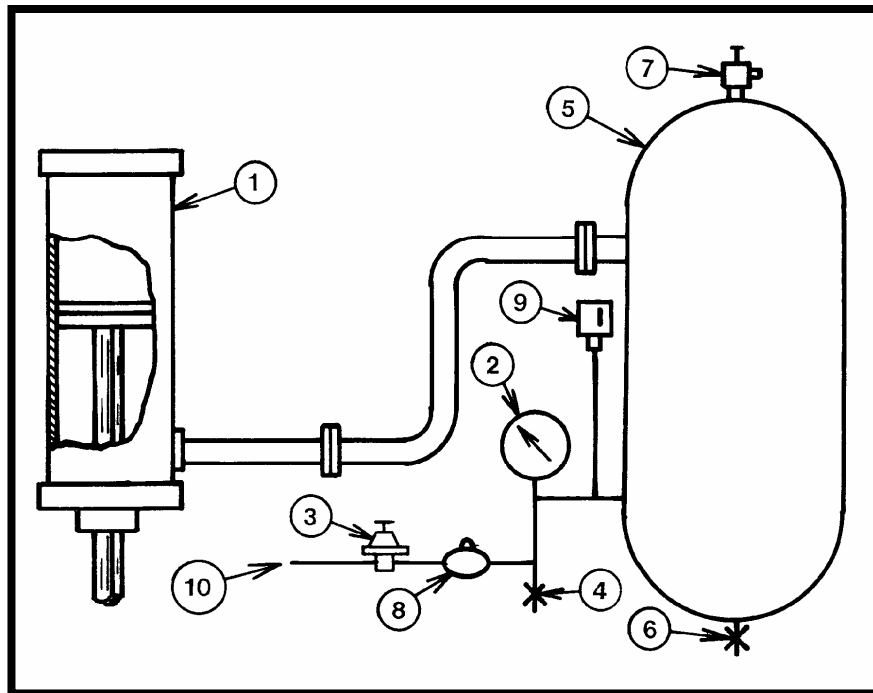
Diagram of a typical mechanical press counterbalance system: (D1) counterbalance cylinder with a piston rod that attaches to the press slide (not shown); (D2) pressure gauge; (D3) pressure regulator; (D4) blow-down valve; (D5) surge tank; (D6) water drain valve; (D7) safety pop-off valve; (D8) check valve; (D9) low air pressure switch; (D10) shop air inlet.
